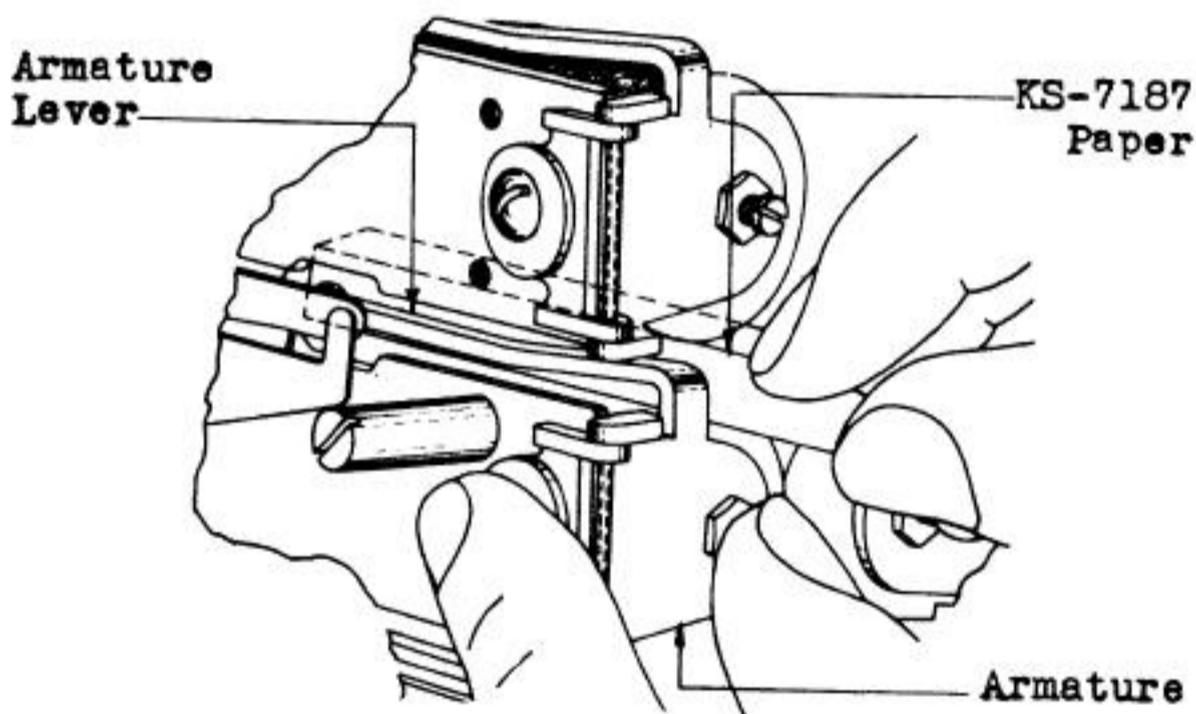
Method of Cleaning Backstop on 221, 222, 223, 224, 225, 247, 248, 251 and 252 Type Relays
